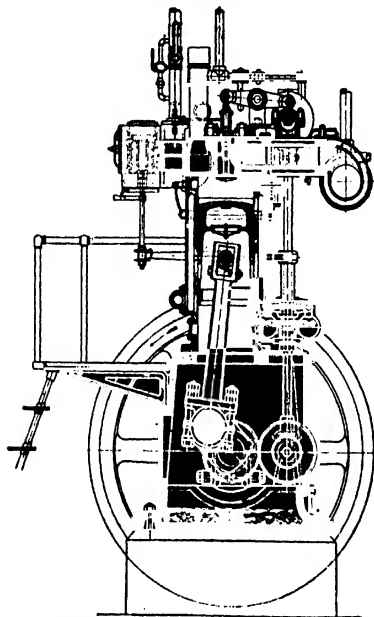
Side Elevation of Bruce-MacBeth Gas Engine
